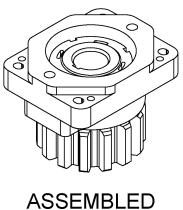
TOOL HEAD ASSEMBLY (P/N 57781)
